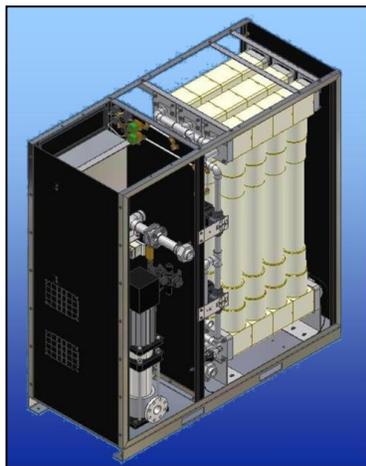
Typical Membrane System Configuration (Figure Courtesy of GE Water)
